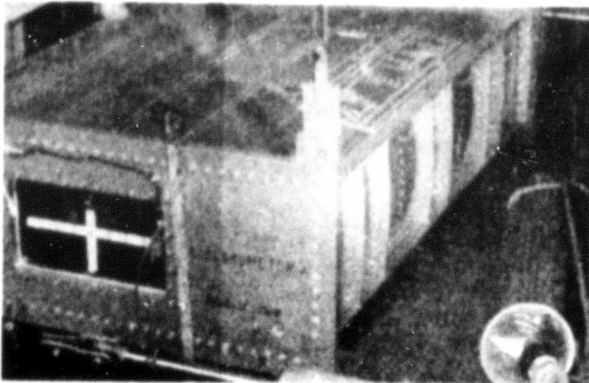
External Damage to Test Tank No. 4. Tank was rebuilt from Tank No. 3. Steel rivets were added internally and skin doublers were added to the upper and lower surfaces (Figure B-24). Six rivets popped during Drop No. 18 — a 40-g arrested stop.
